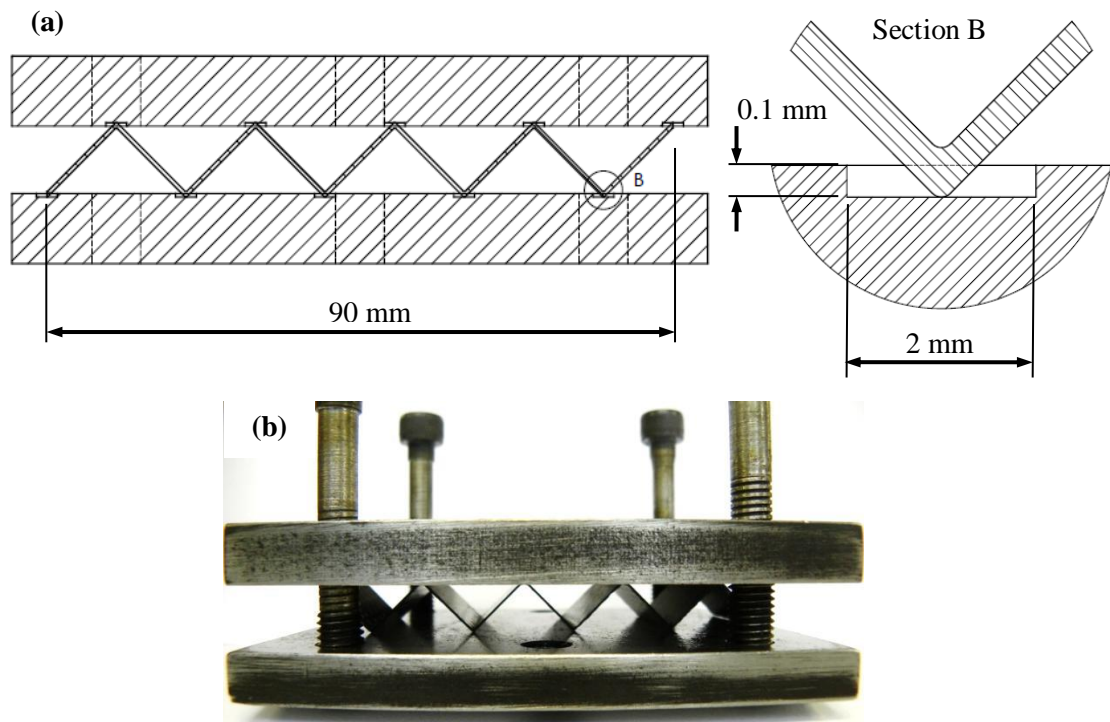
(a) Cross-section showing the bonding areas of the specimen to the loading platens, (b) a photo of a CFRP specimen bonded between two loading platens.
